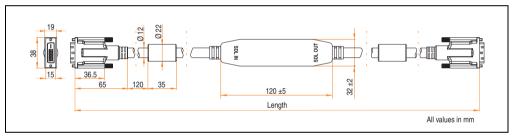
Dimensions - SDL flex cable with extender 5CASDL.0x00-13
